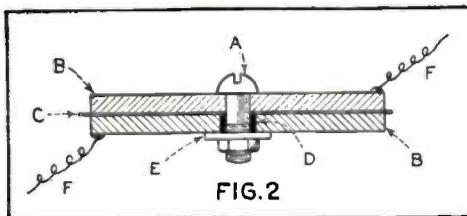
Section of assembled crystal unit. "A" is a machine screw and nut; "B," the metal plates; "C," tracing cloth bearing crystal particles; "D," insulating bushing; "E," insulating washer; "F," wire terminals
